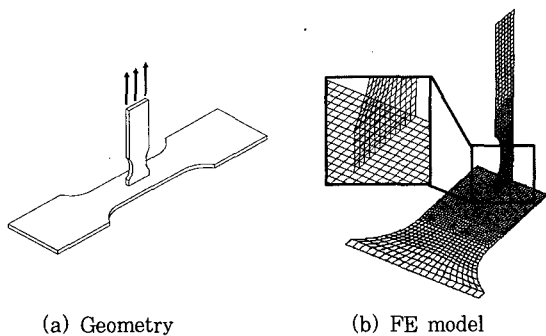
Longitudinal load carrying box fillet weldment
